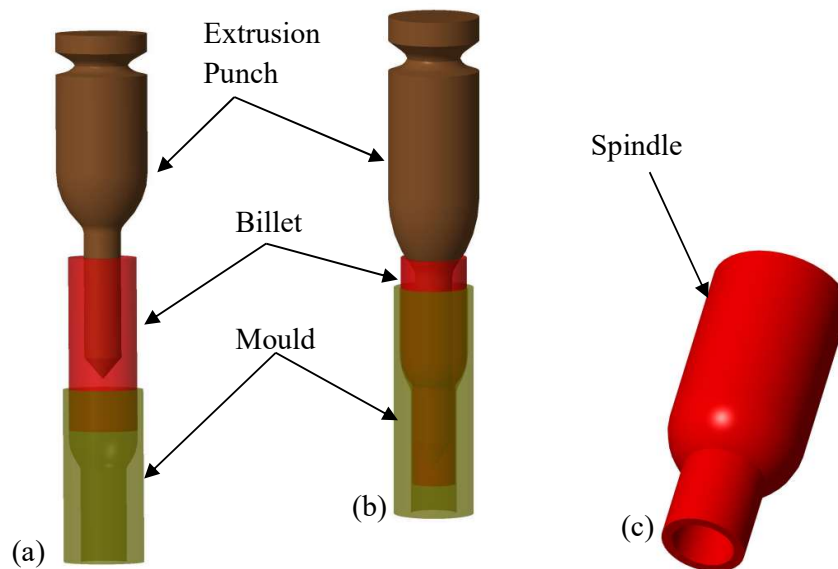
Tube extrusion process (a) stage 2 of tube extrusion, (b) stage 3 of tube extrusion and (c) end product from tube extrusion (spindle)
